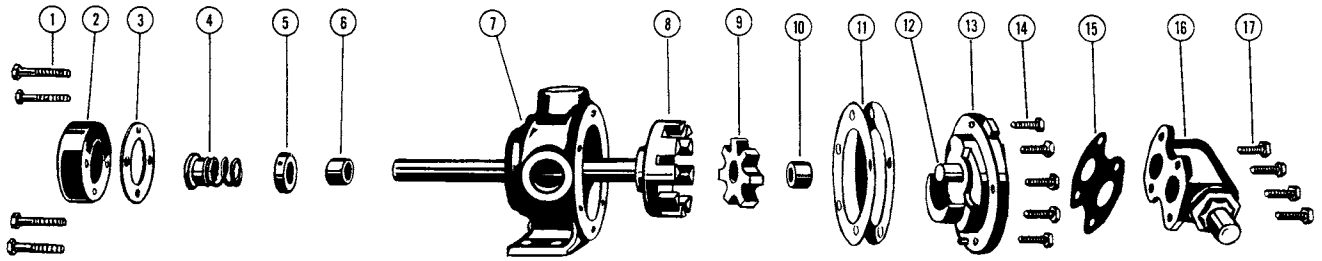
EXPLODED VIEW MODEL G432 PUMP
